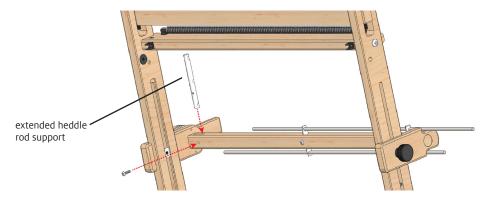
INSTALL EXTENDED HEDDLE ROD SUPPORT IN SHEDDING DEVICE
